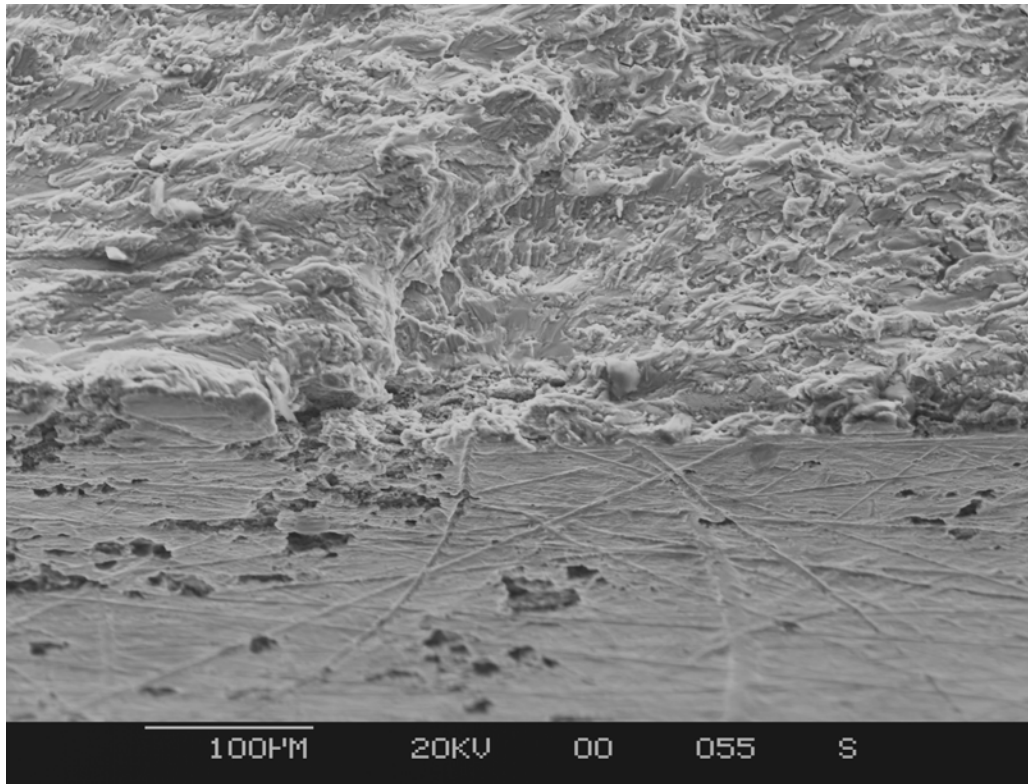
Surface View of Crack Origin C on Specimen 5967.
